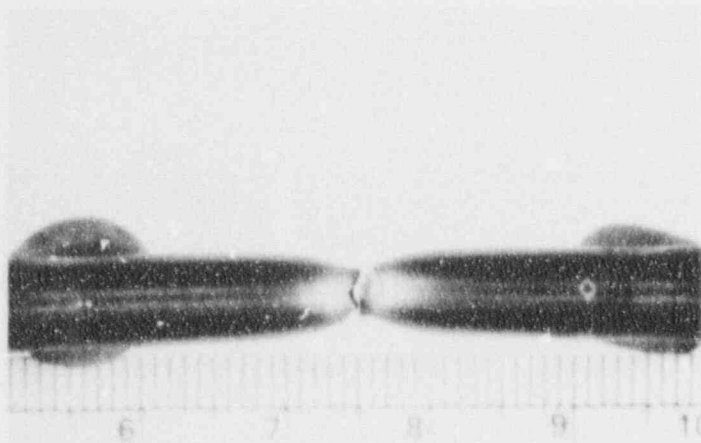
Fracture Location, Necking Behavior and Fracture Appearance for Irradiated Base Metal Tensile Specimens
